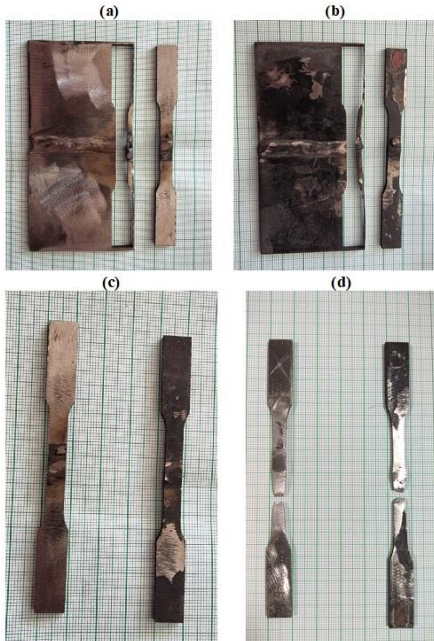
(a, b, c) Cutting of ASTM specimens for tensile test; (d) Broken samples out of tensile test.
